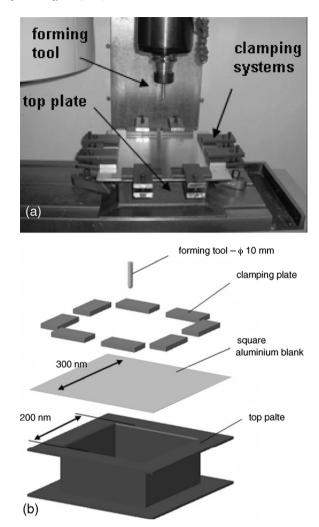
(a) Experimental setup for SPIF experiments (three-axis milling machine tool–SPIF tooling system). (b) Tooling system used for SPIF experiments.
